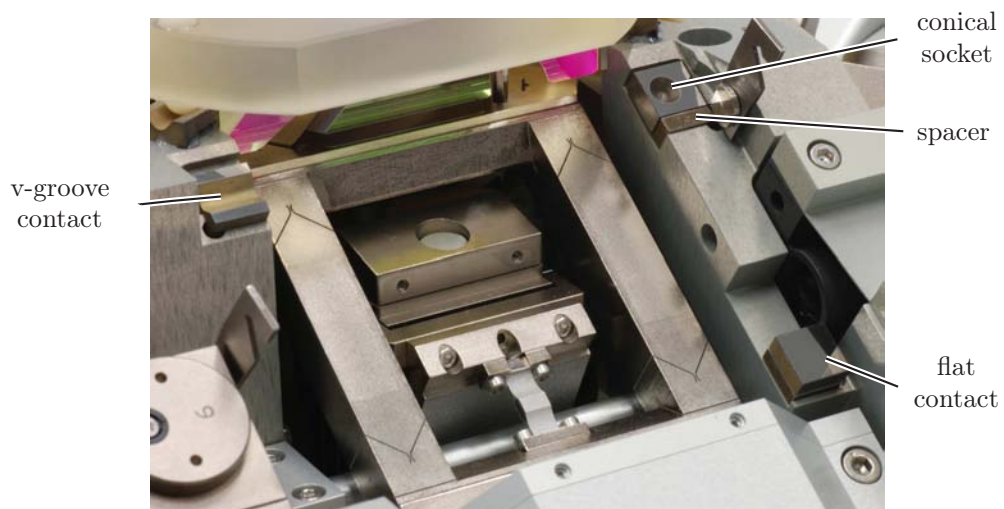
/ The interferometer's kinematic mount is adjusted using spacers. The conical socket, v-groove and flat contact are machined from tungsten carbide gauge blocks.
